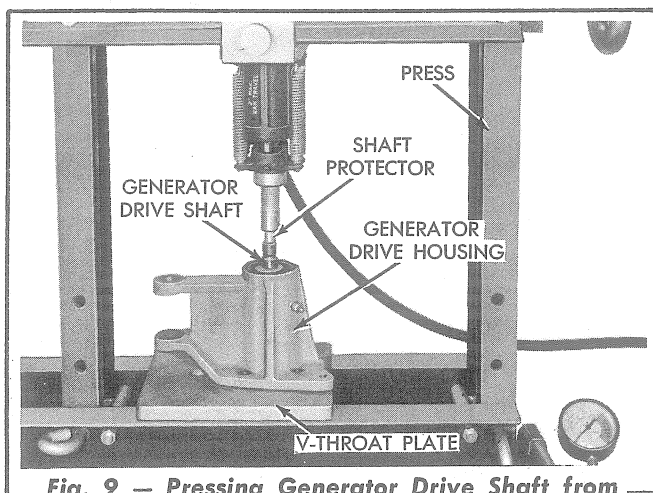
Pressing Generator Drive Shaft from Generator Drive Housing (Tractors Prior to Serial No. 4001 Shown — Tractors Serial No. 4001 and Above Similar)
